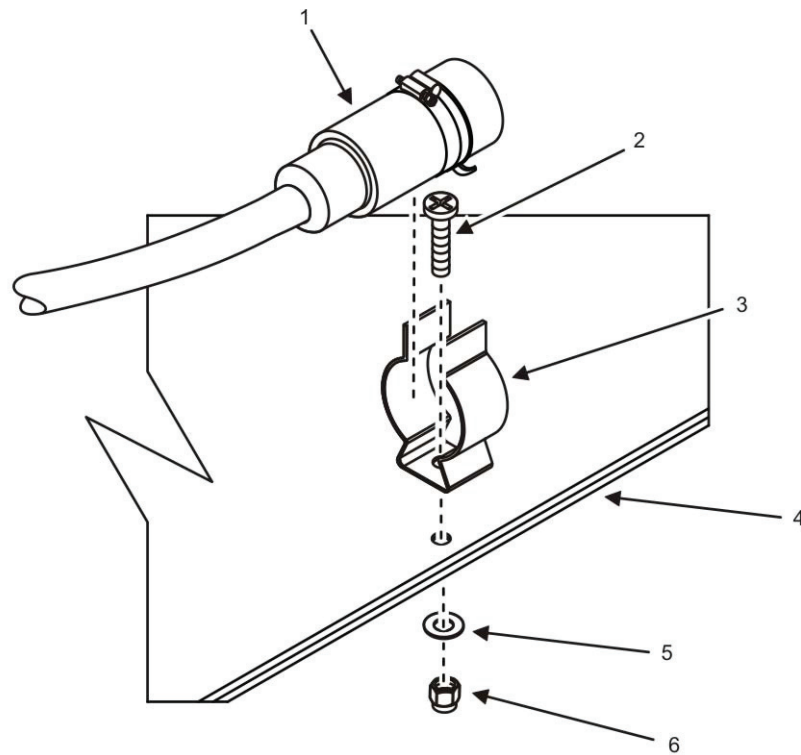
Trailer Lights Cable and Plug Clamp — Detail.
